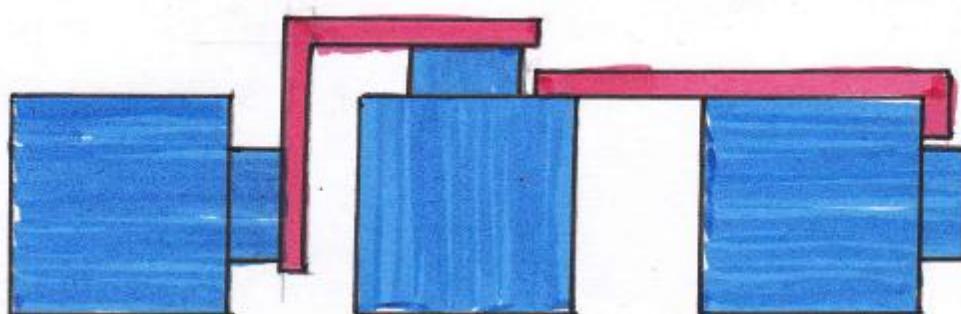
A sketch of concept B1 - shaft-shaft, body-body.
